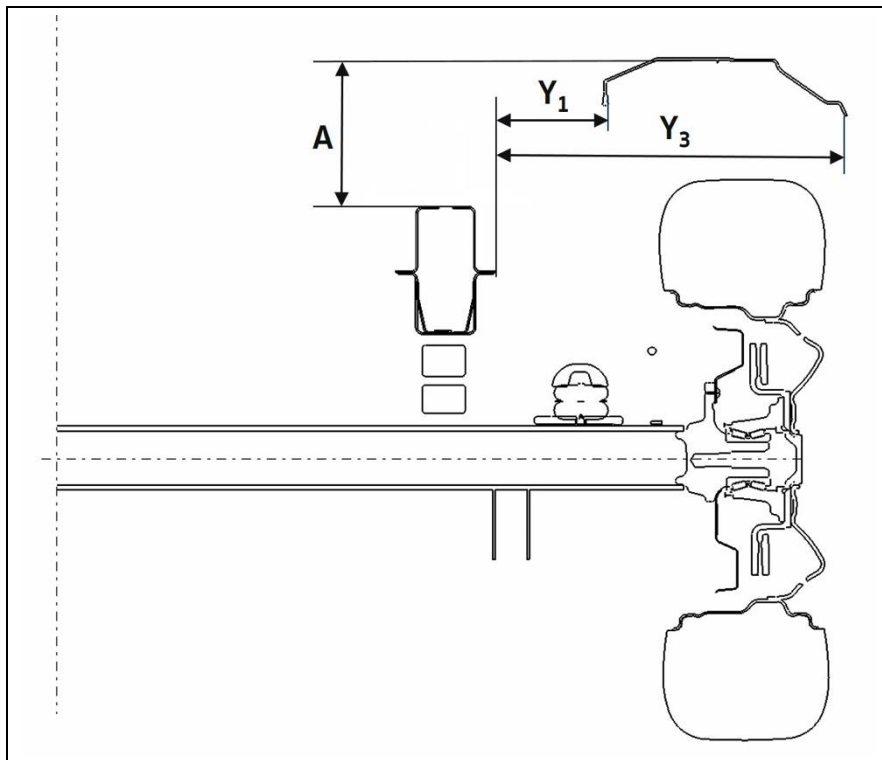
A-A cross-section, wheel clearance for wheel housing with partial cover (example: side platform)
